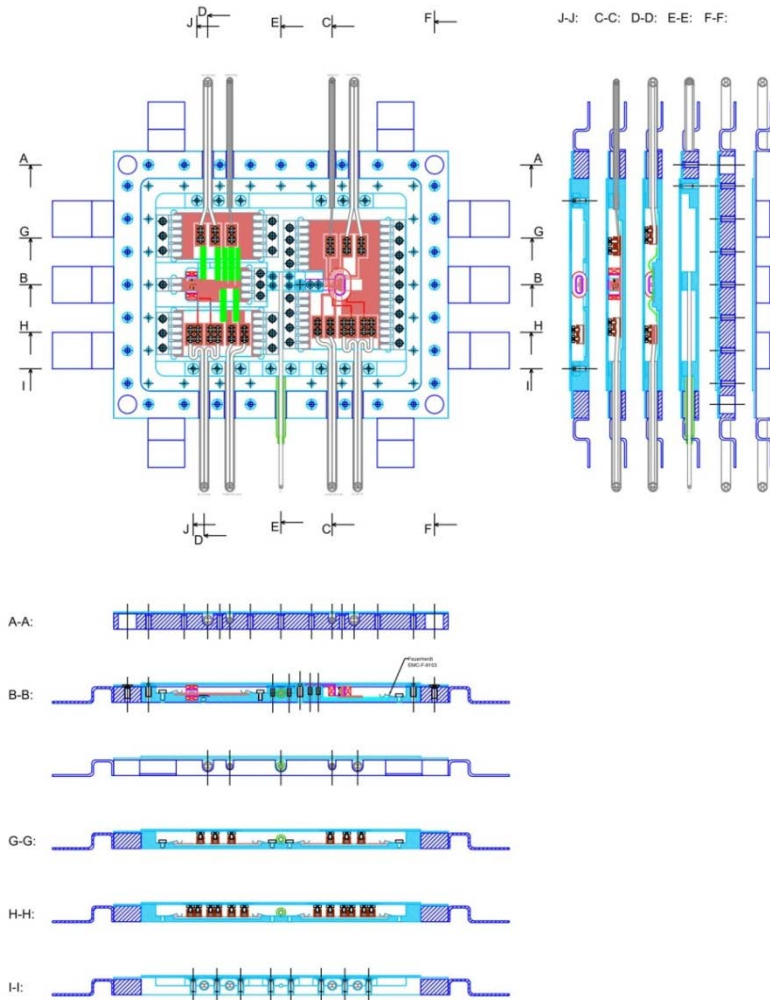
CAD drawing of the sensor enclosure housing one magnetometer for the poloidal field direction and one for the radial direction.
